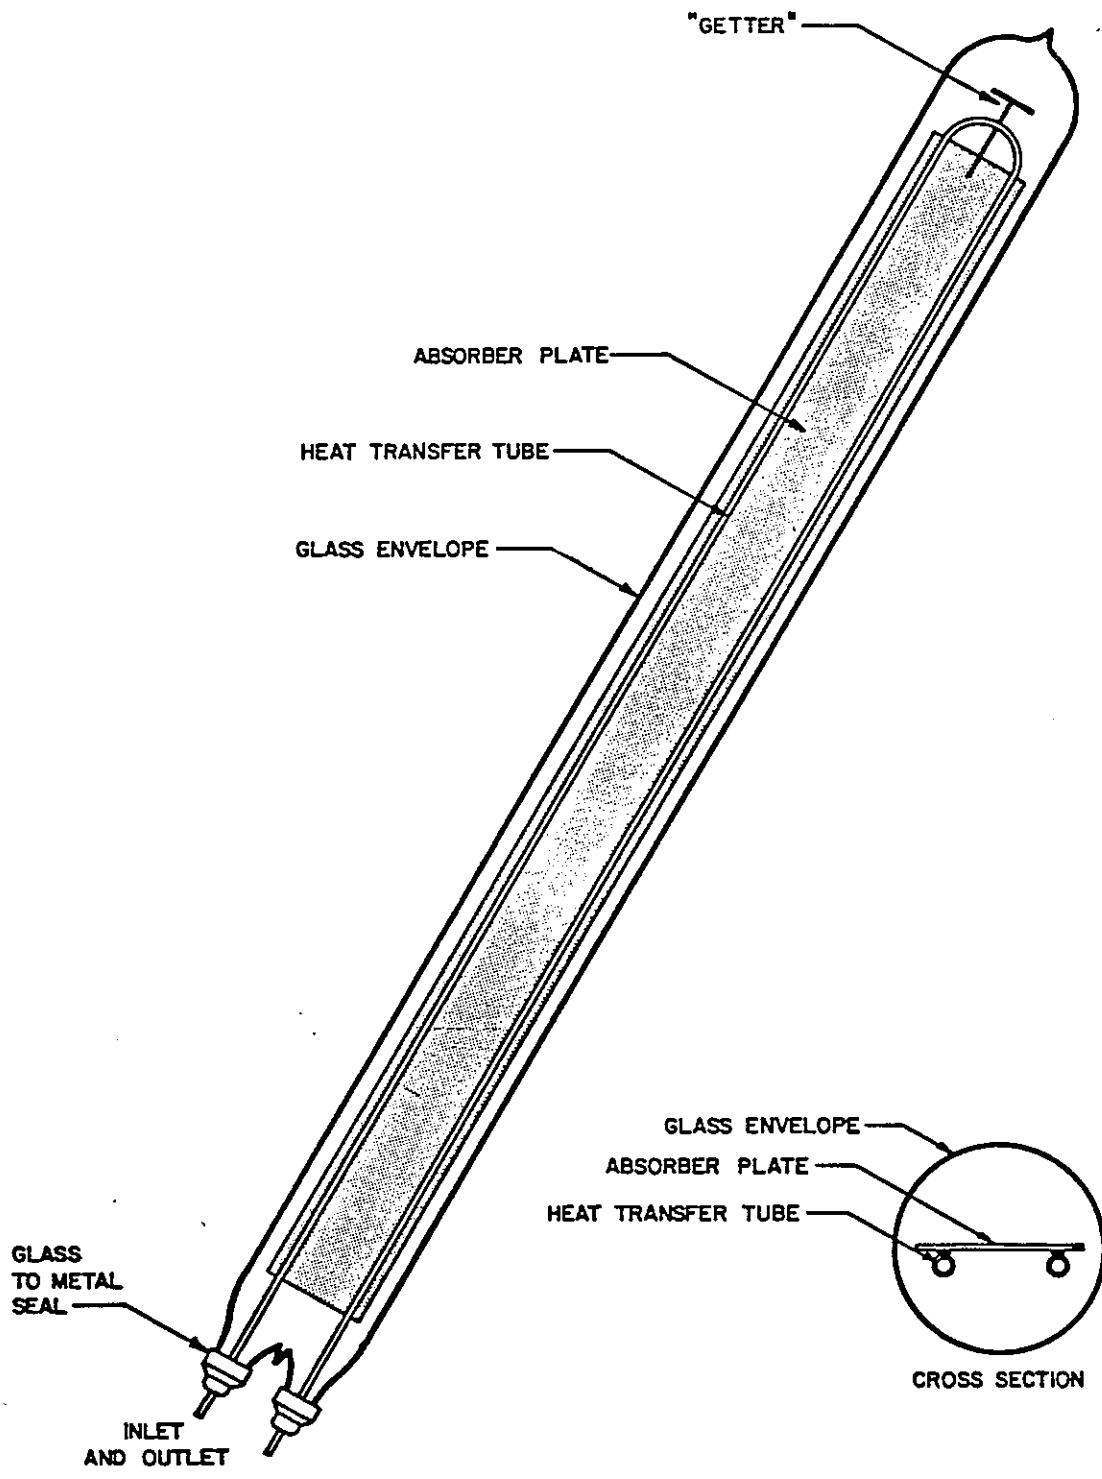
Metal Fin in Vacuum Tube Type -- U-tube Heat Extraction
